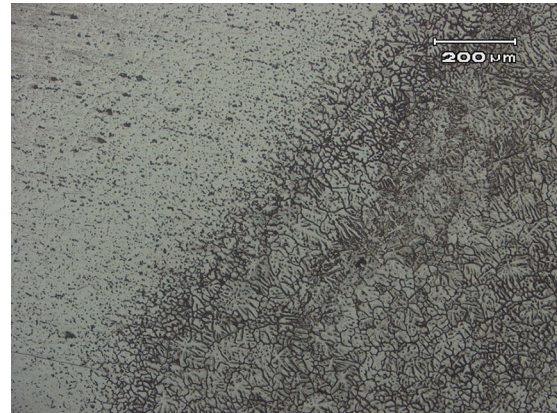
Interface between the weld pool and the heat-affected zone on the AA5083 side of AA2219-AA5083 weld joint made by GTAW. The etchant is Keller's reagent
